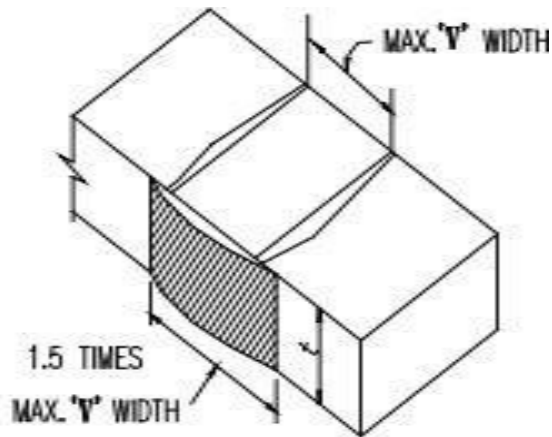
Butt Welded Joint with Run On & Run Off Plates
